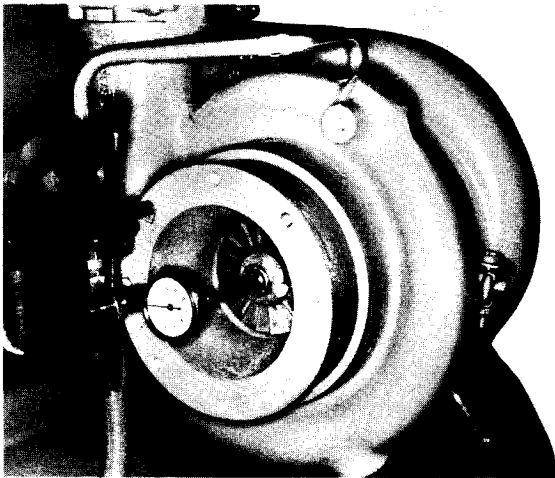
, (N11956). Checking turbocharger bearing and clearance
